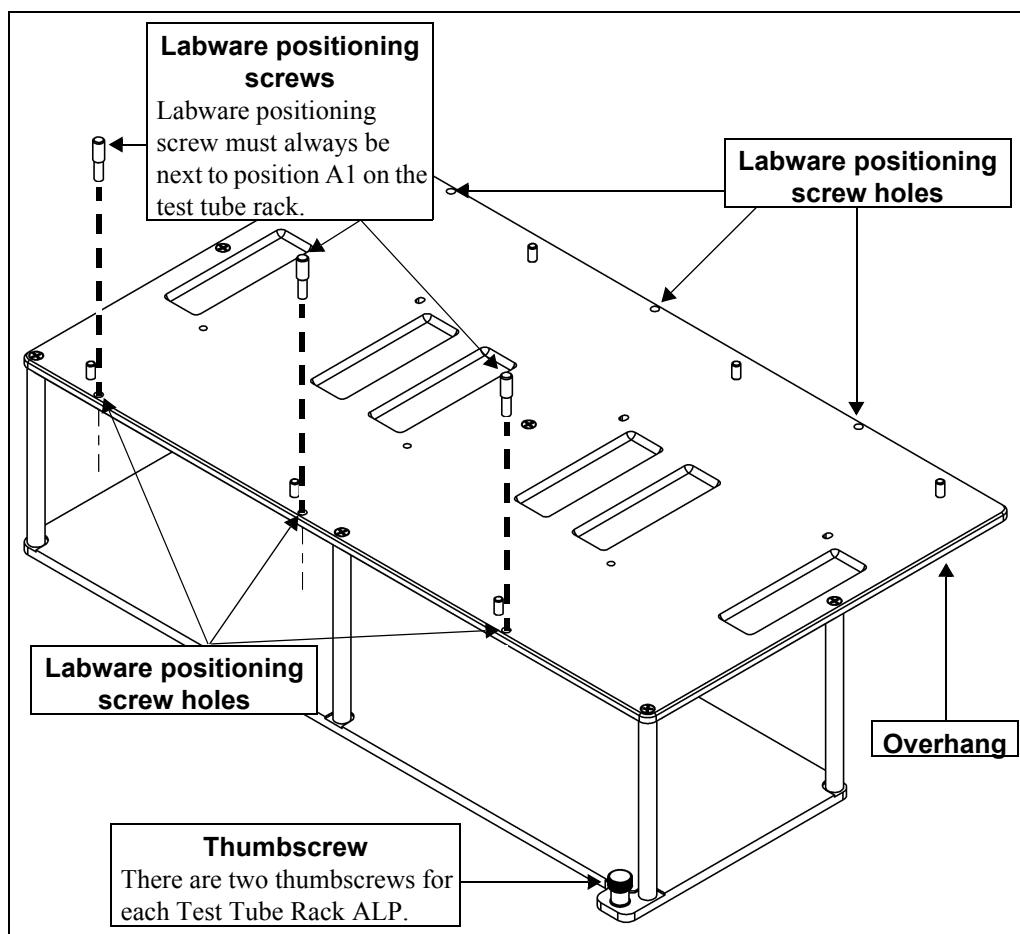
Labware positioning screws on a 1 x 3 Test Tube Rack ALP (right facing)
